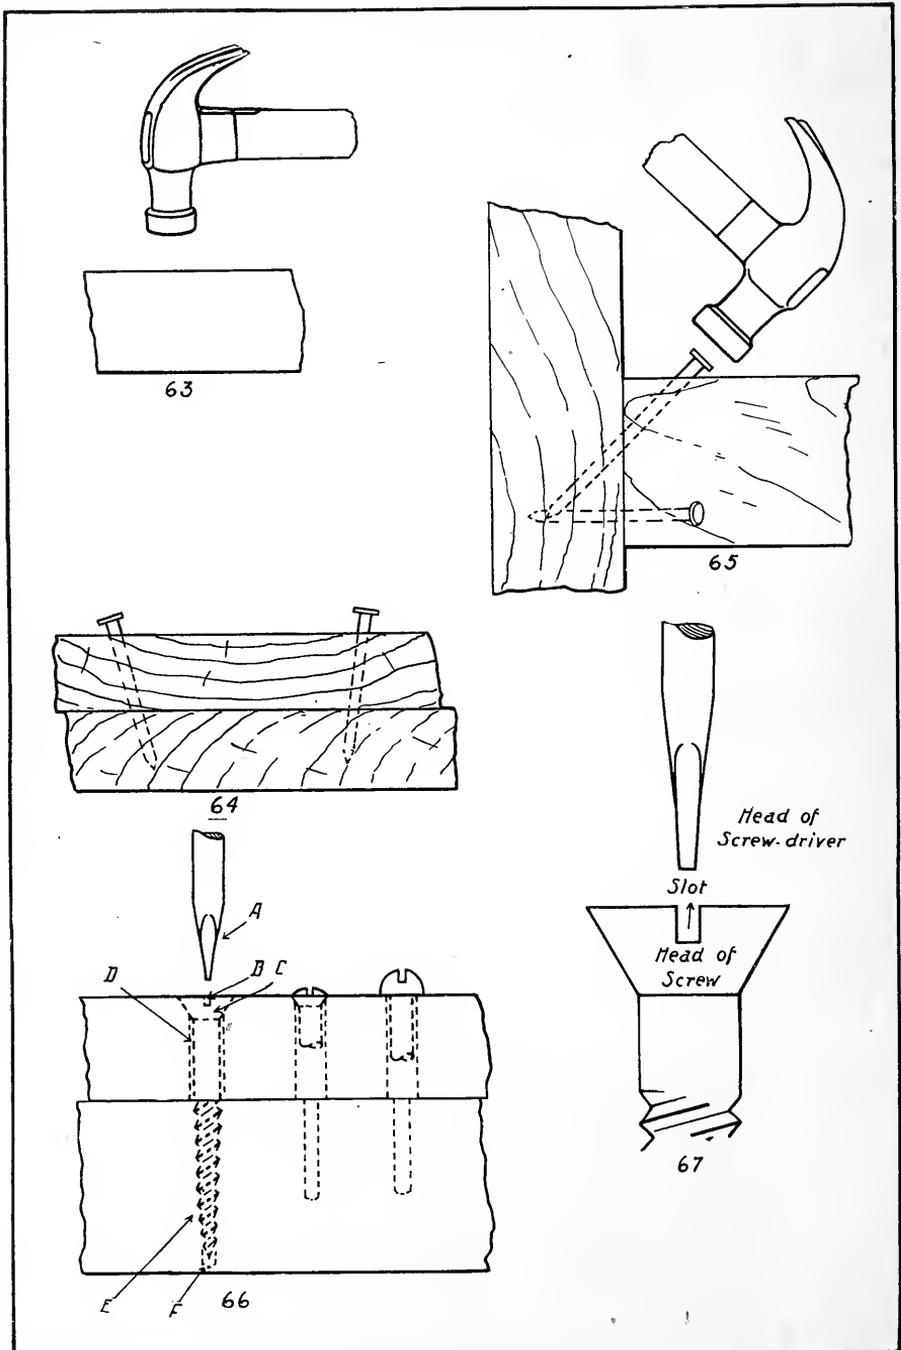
HAMMER POSITION. FIG. 64.—METHOD OF NAILING. FIG. 65.—TOE-NAILING. FIG. 66.—DRIVING SCREWS. FIG. 67.—ADJUSTMENT OF SCREW AND DRIVER.
